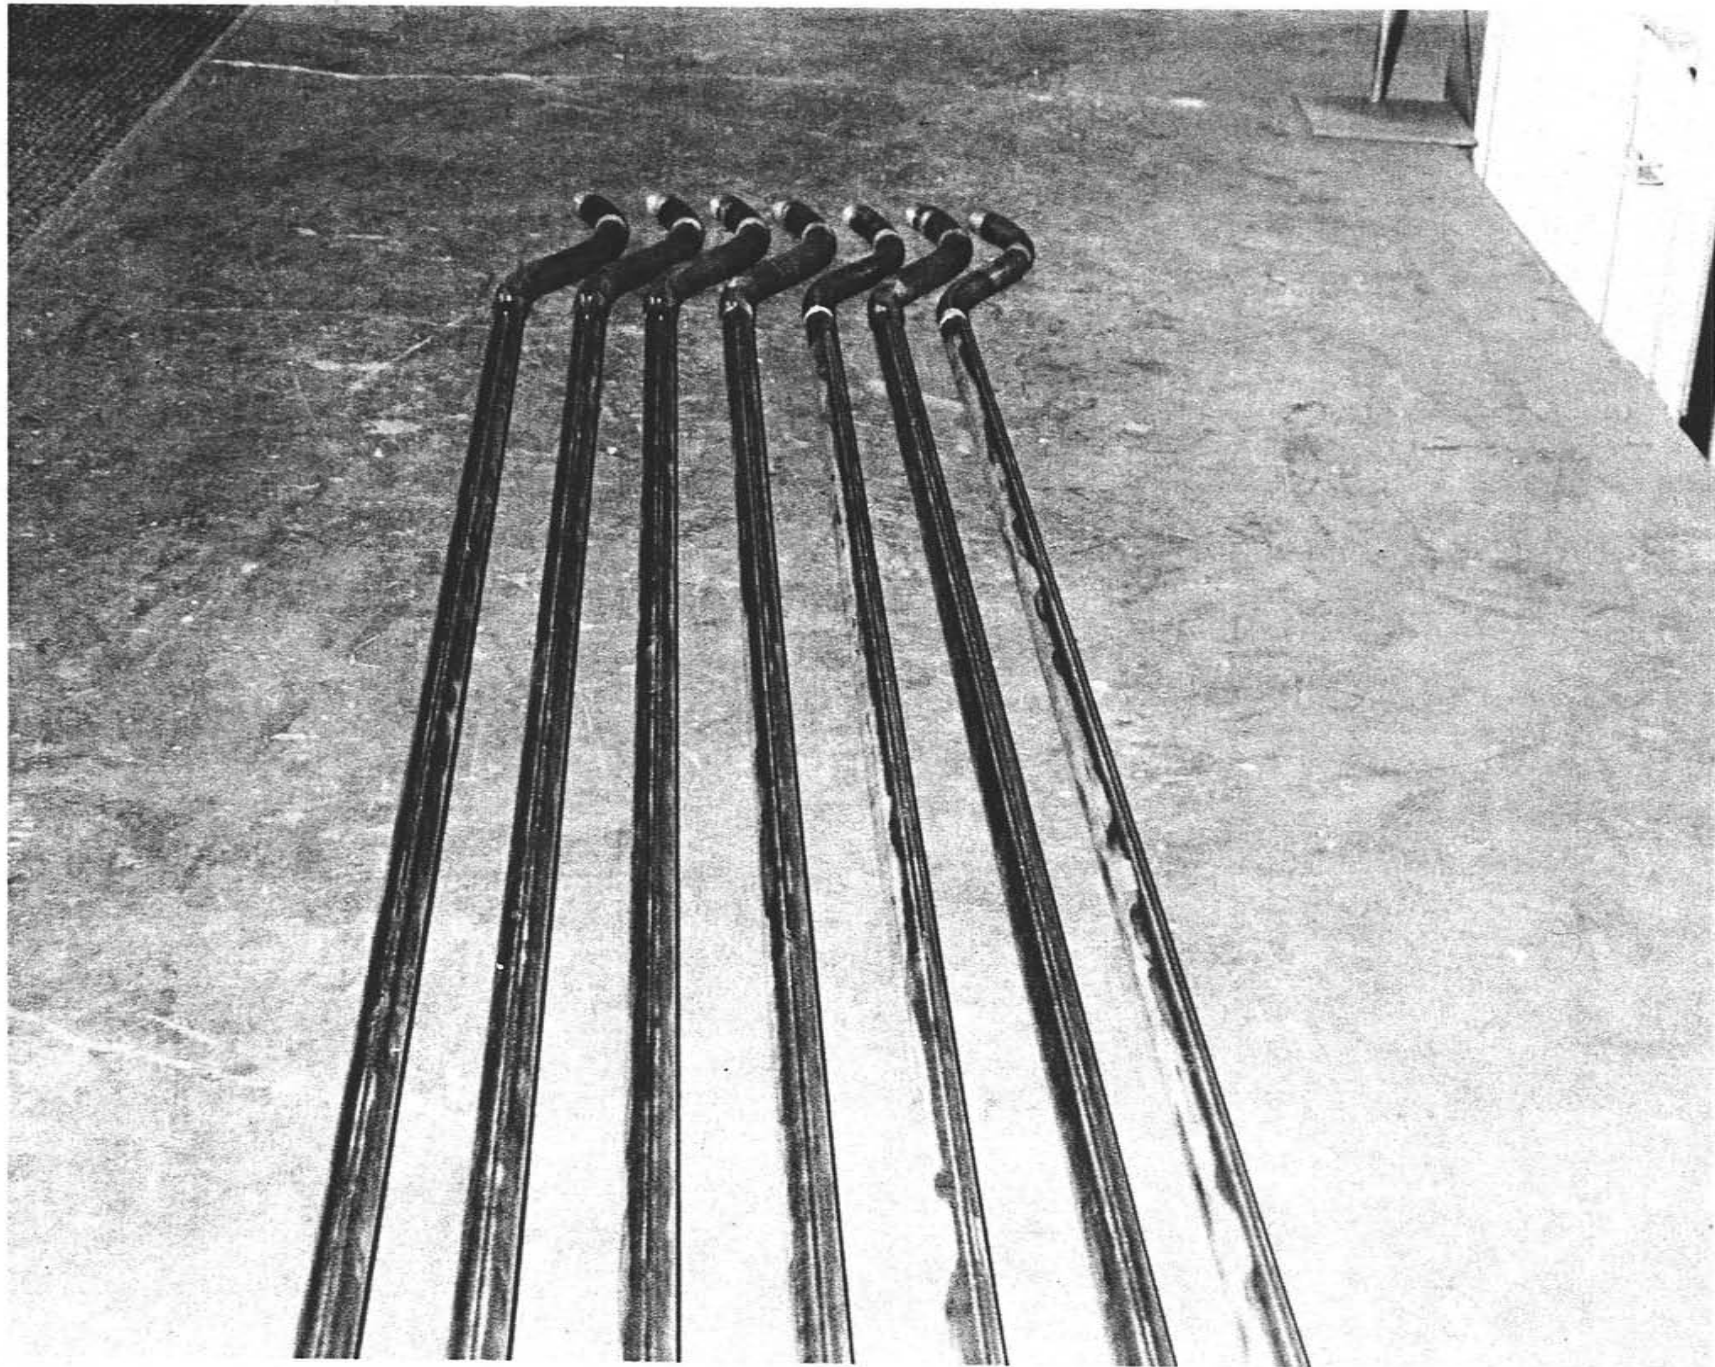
COMPLETED SAFE END ATTACHMENT
